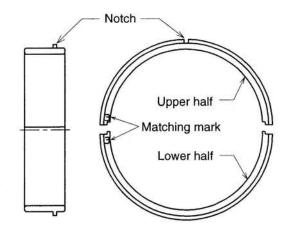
Shape of Labyrinth Ring (Upper and Lower Halves)
